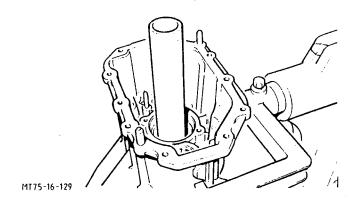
Drive out double-lipped radial oil seal with suitable length of tube.
